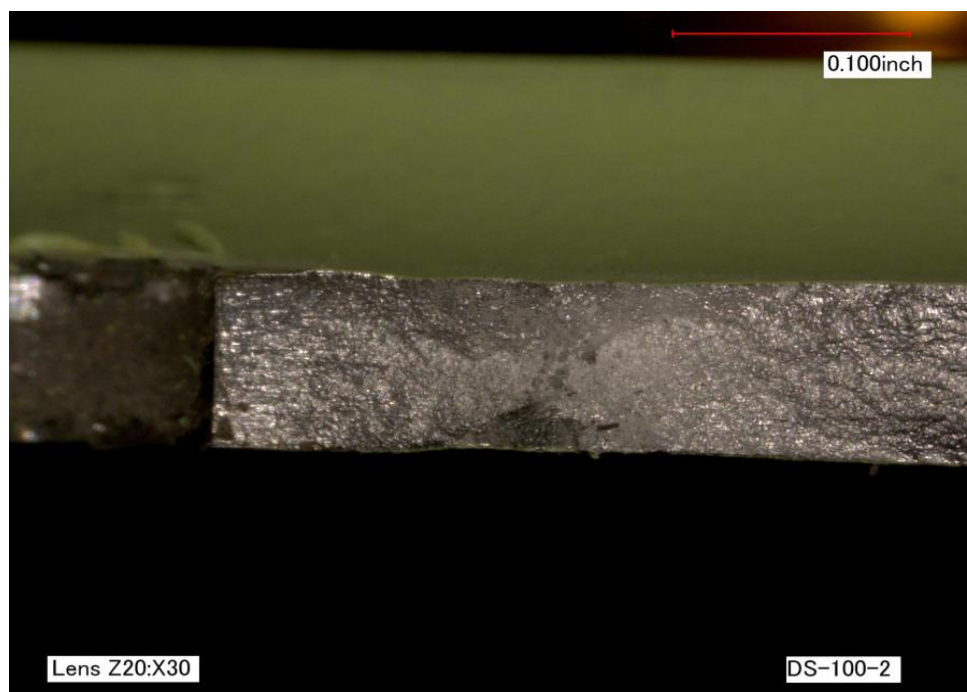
DS-100-2 Fatigue Fracture Surface (X30)
